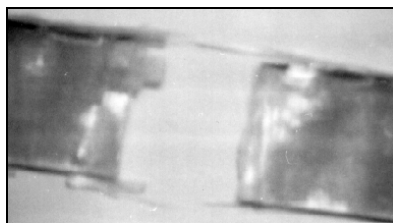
A view of impact cracked test specimen at  $t = -50\text{ }^{\circ}\text{C}$  (the appearance of brittle crack); test sample I-D-1.
